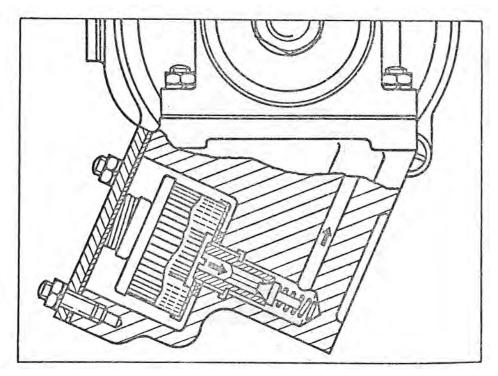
INJECTION PUMP OIL FILTER ARRANGEMENT
